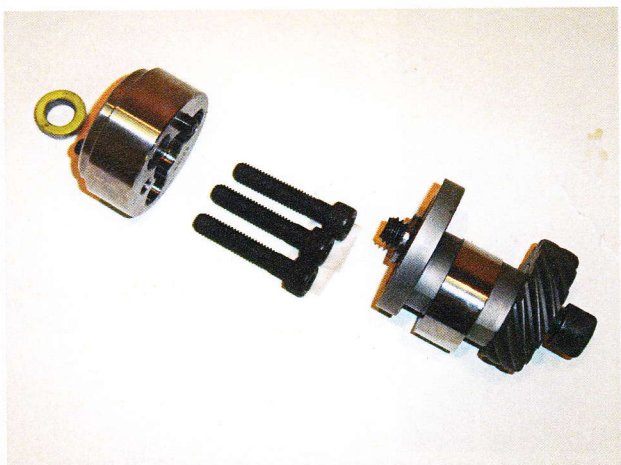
Installation sequence with Yellow Spacer. Photo shows how Drive Assembly bolts to Camshaft.
